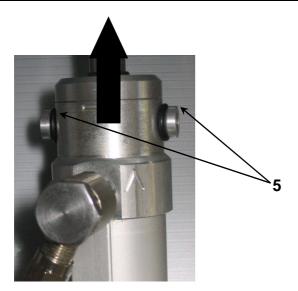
Pneumatic actuator PUAV: direction of releasing the lock.
